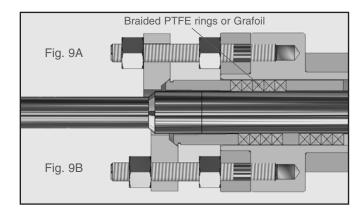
A: Packing: Formed Rings Figure 9B: Double Packing: Formed Rings
